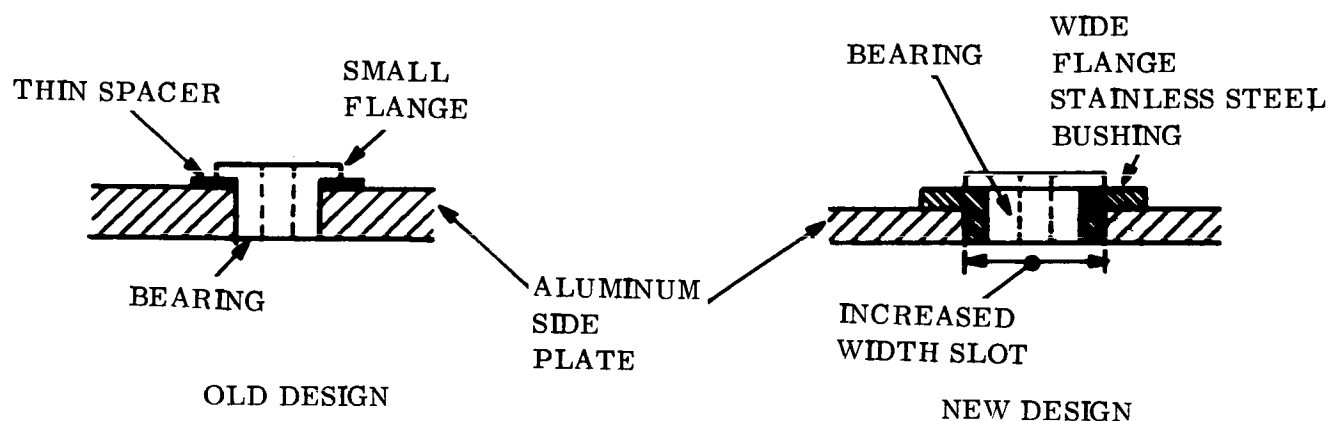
Redesign of Flange to Correct Reverse Wind Failure
